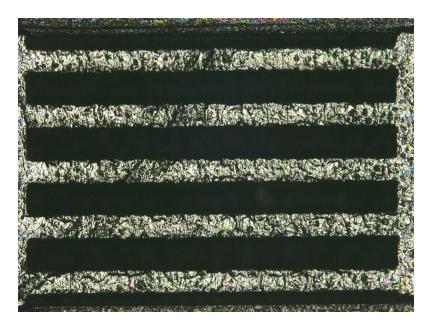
Microchannels machined on the mold using laser (after cleaning)
